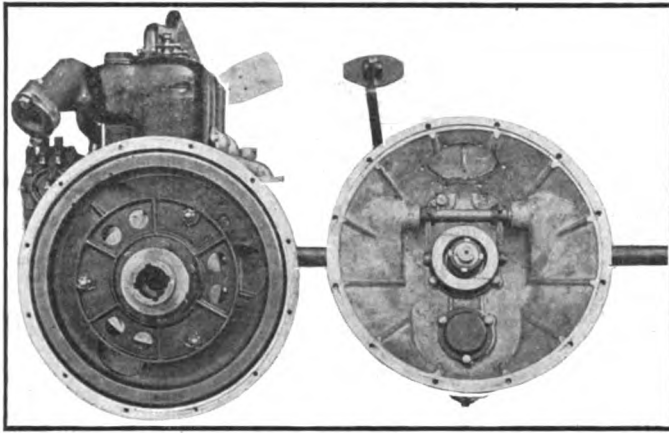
Looking at the motor with the transmission gear removed, showing the housing in the flywheel
